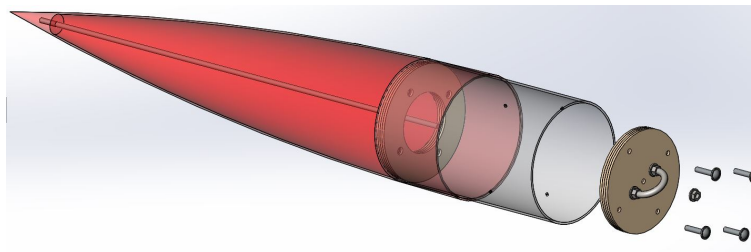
Exploded view of the nose cone and removable bulkhead assembly.
